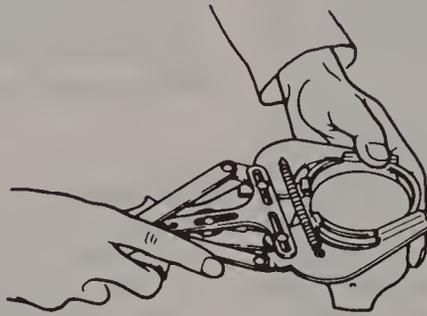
Removing the piston rings (note the special tool being used) (Sec 27)
